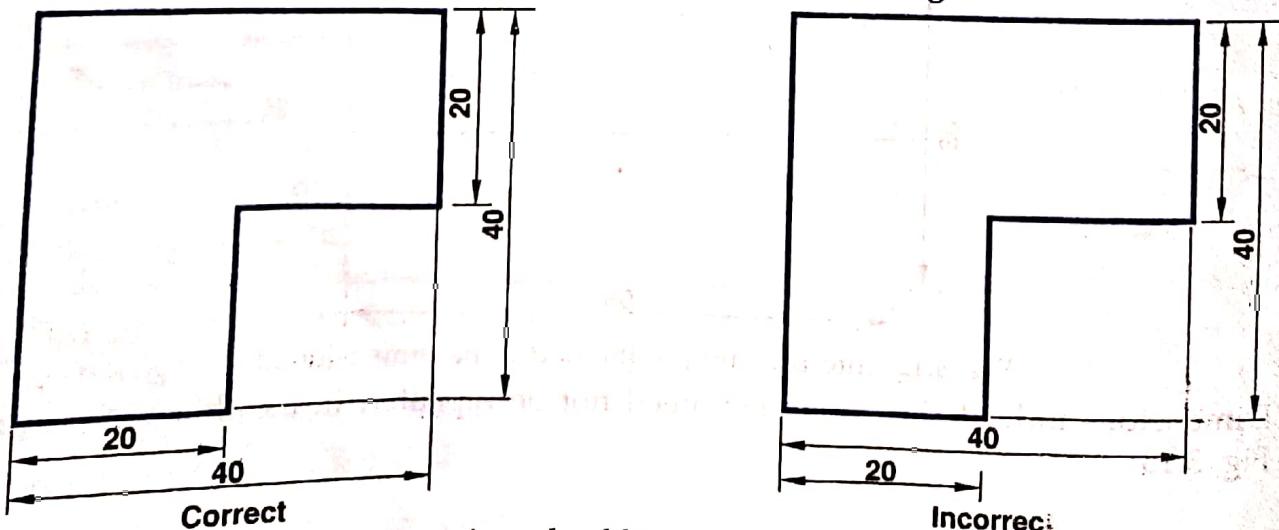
Larger dimensions should be placed after the smaller dimension
